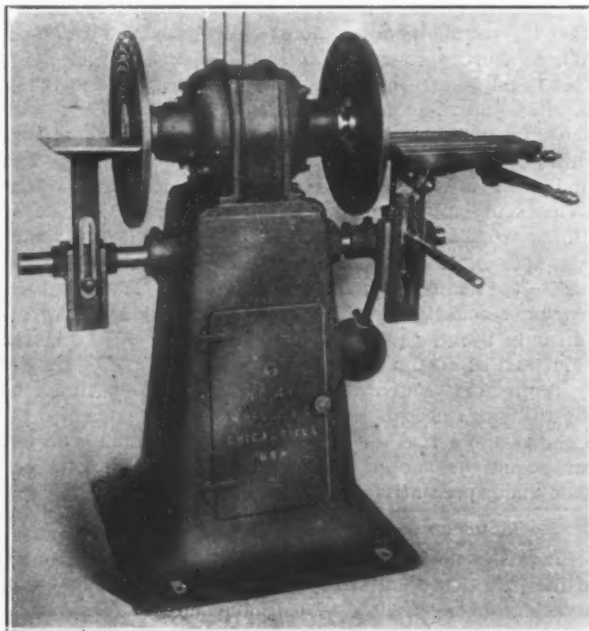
The No. 41 Alternating Current Motor Driven Besly Spiral Disk Grinder.
